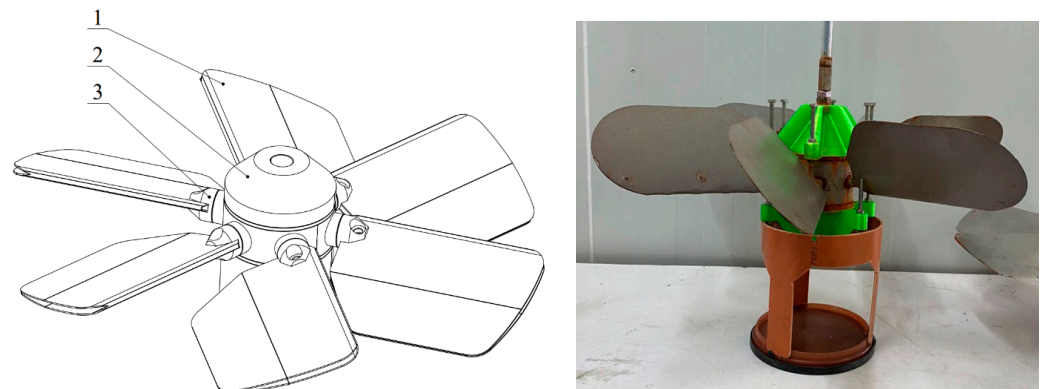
Three-dimensional model and picture of the hydraulic turbine: 1—blades, 2—fairing, 3—forks.
